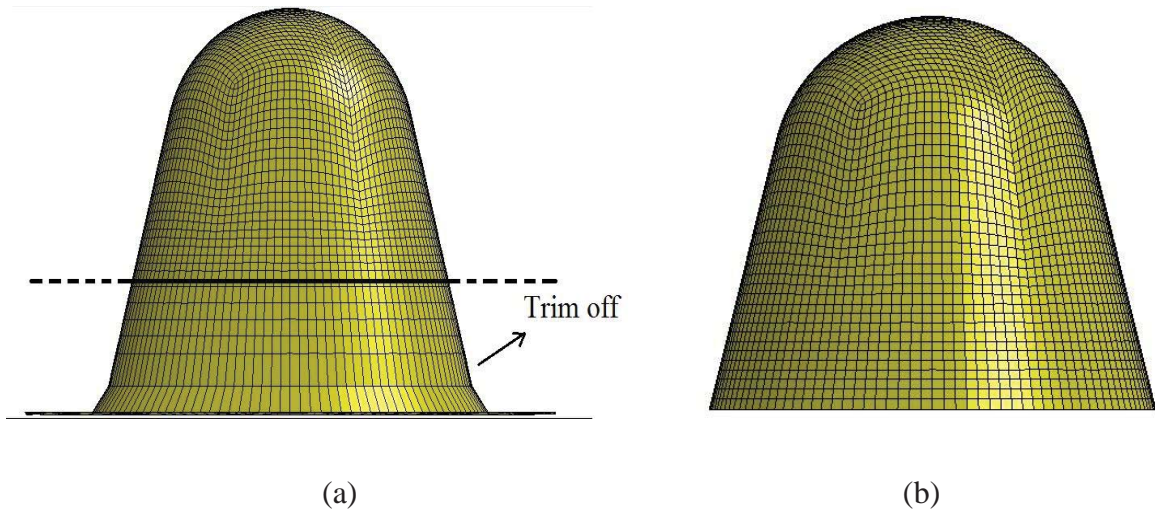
Trimming process (a) Output material in the second drawing, (b) The final shape of inner core.
